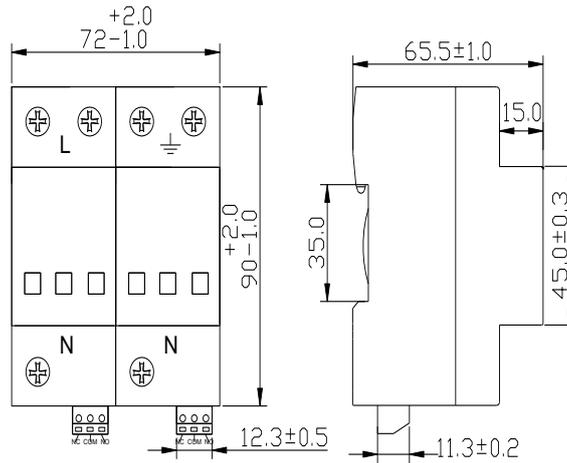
Dimensions of RPH440-50/1N+NPE (unit: mm)
